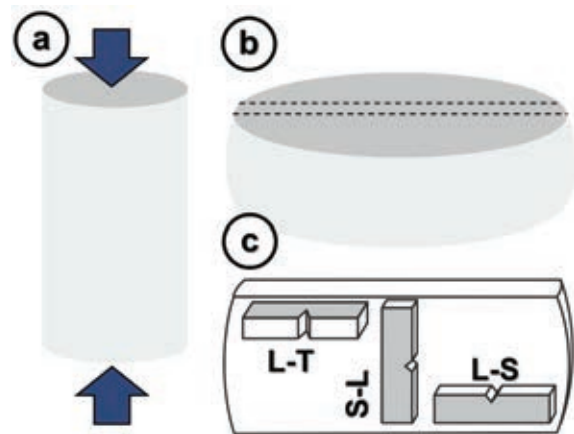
(a) Round blanks are produced from sintered rods by forging them perpendicular to the axis (indicated by the arrows). (b) The first step of specimen fabrication consisted in cutting the round blank in halves and then into a slice. (c) For the present investigations specimens were fabricated in longitudinal-transverse (L-T), in longitudinal-short transverse (L-S), and short transverse-longitudinal (S-L) orientation.
